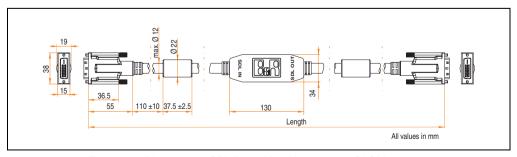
Dimensions - SDL flex cable with extender 5CASDL.0xx0-13
